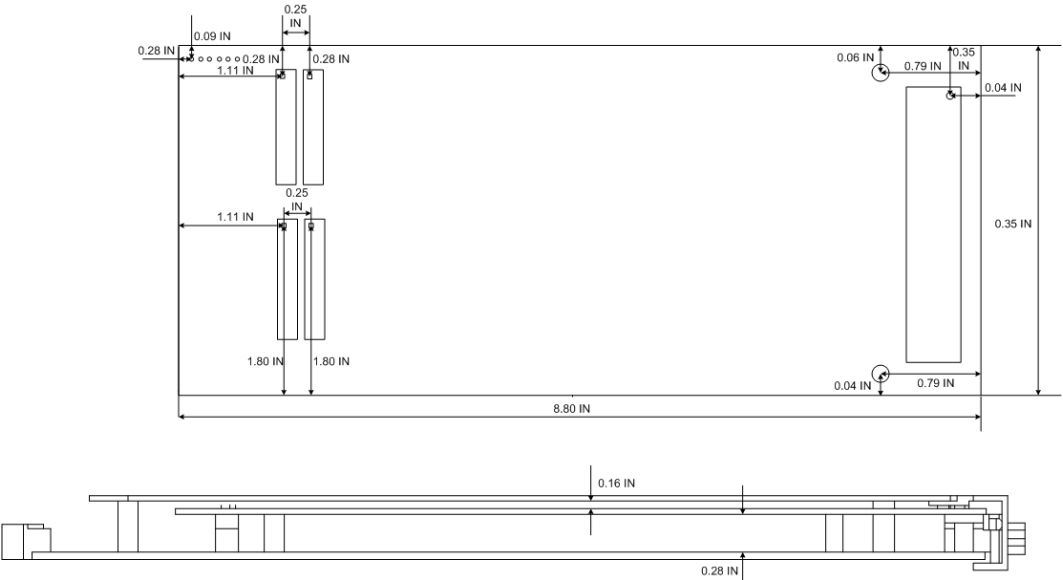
EX1200-7000 DAUGHTER BOARD LAYOUT DIMENSIONS
